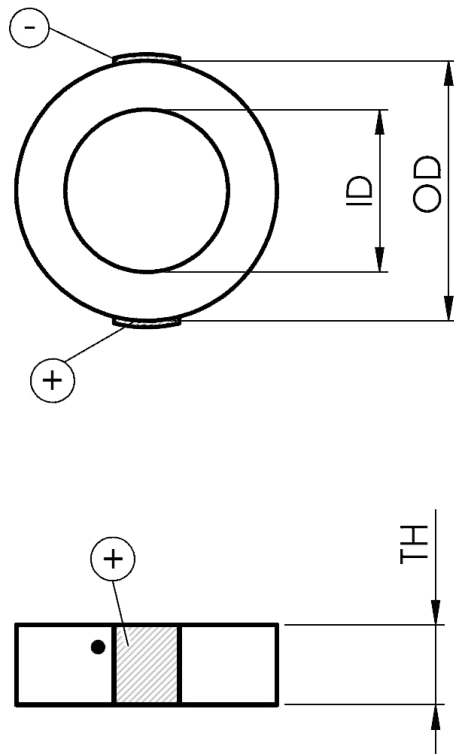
PDxxx: Dimensions (end surfaces of the piezo actuator lapped)
